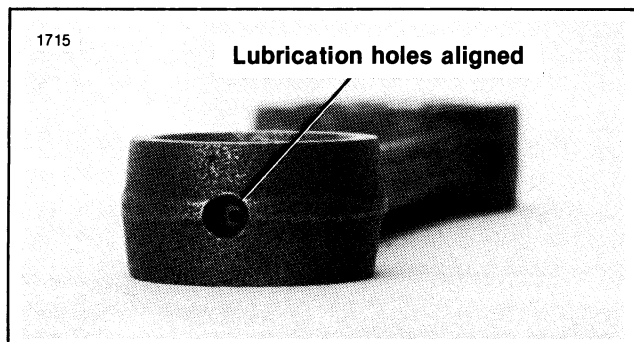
Connecting Rod And Bearing Lubrication Hole
